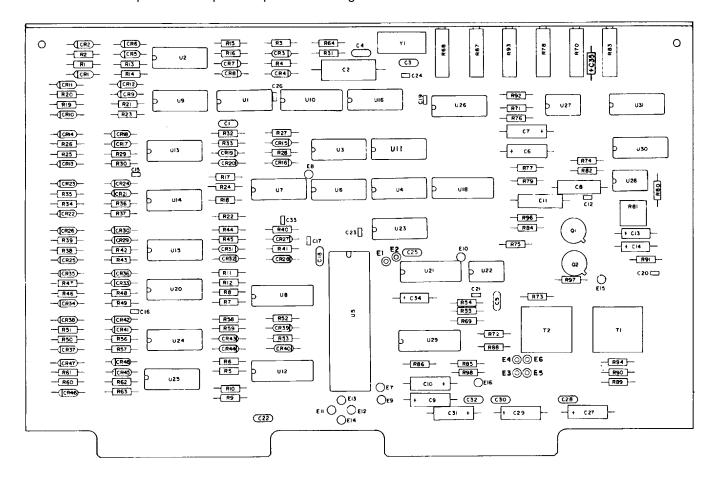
Status XMTR Modem Circuit Card Assembly,1A2A4
